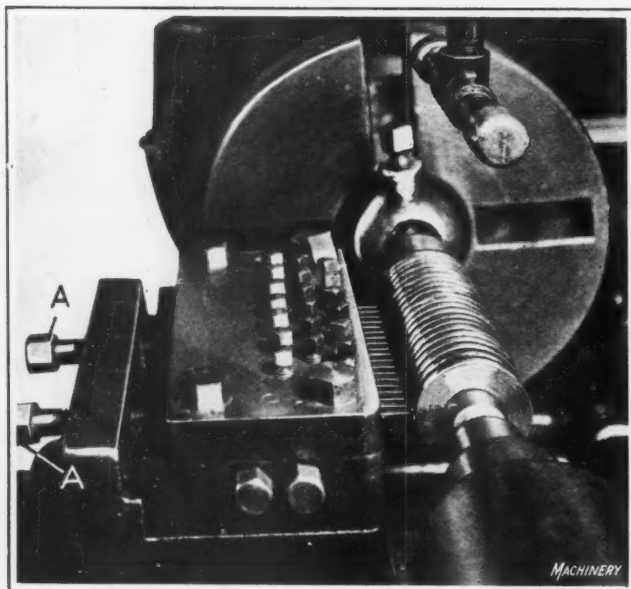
Lathe with Multiple Tool-block, set up for cutting Bronze Washers from a Casting
